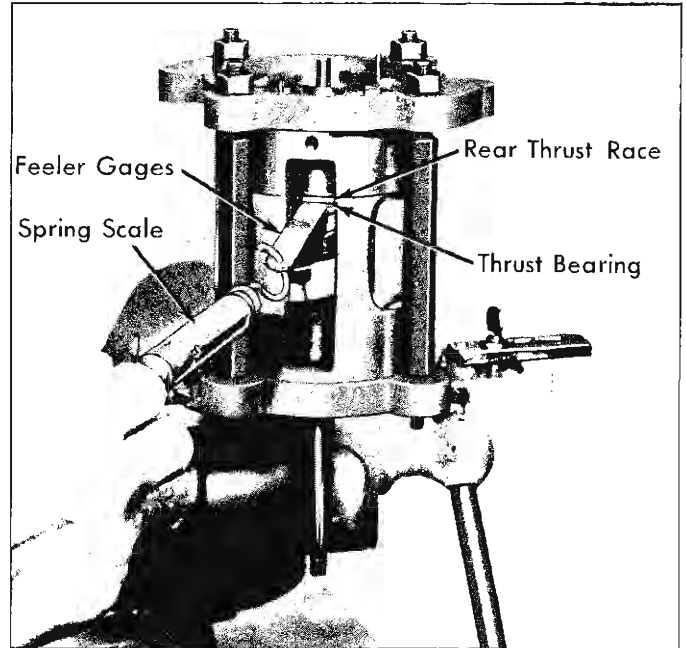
Checking Clearance between Rear Thrust Bearing and Outer Thrust Race
